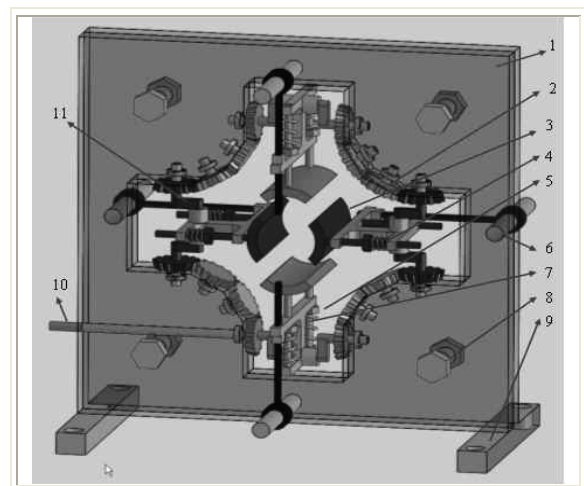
Horizontal withdrawing installation with withdrawing tanks
